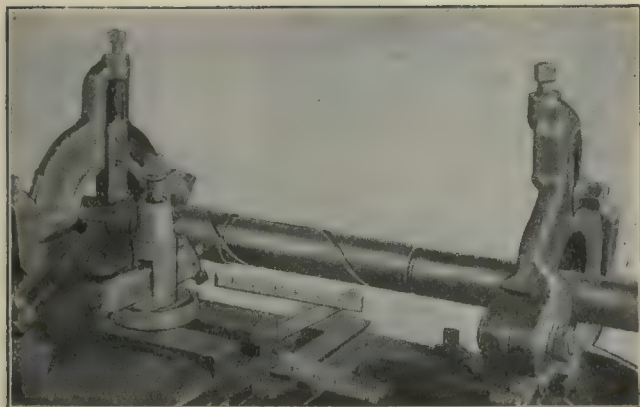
CUTTING AN OIL GROOVE 6-IN. PITCH
